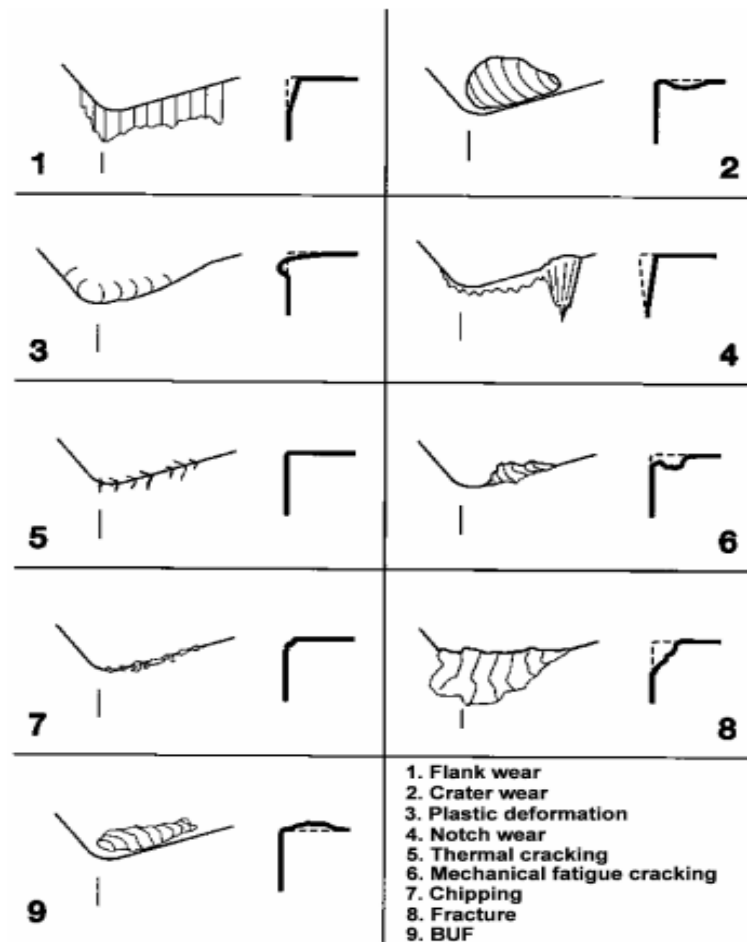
Types of tool wear on cutting tools (Davim, 2008)
